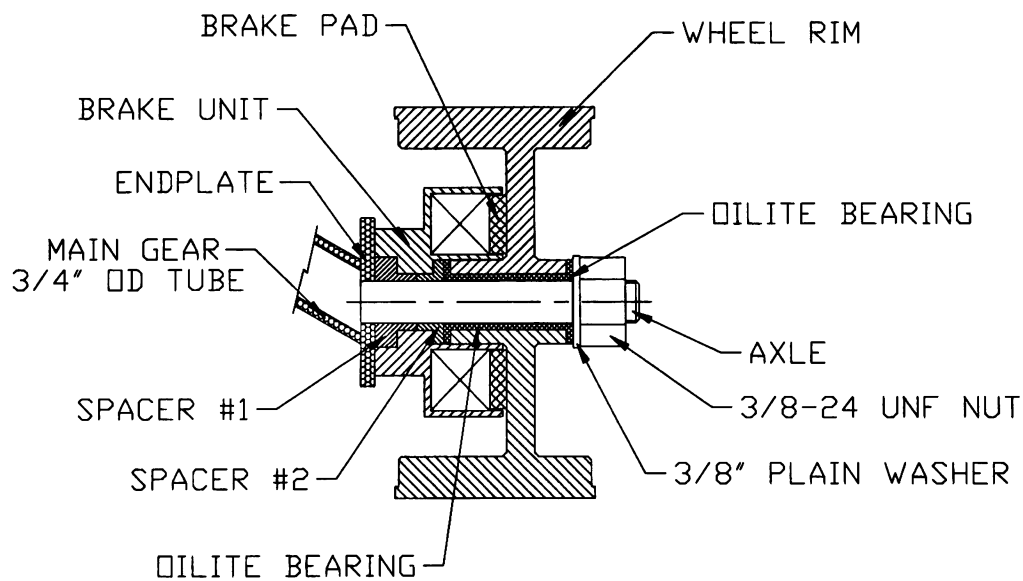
1/3-Scale C172P Main Landing Gear Pneumatic Brakes
